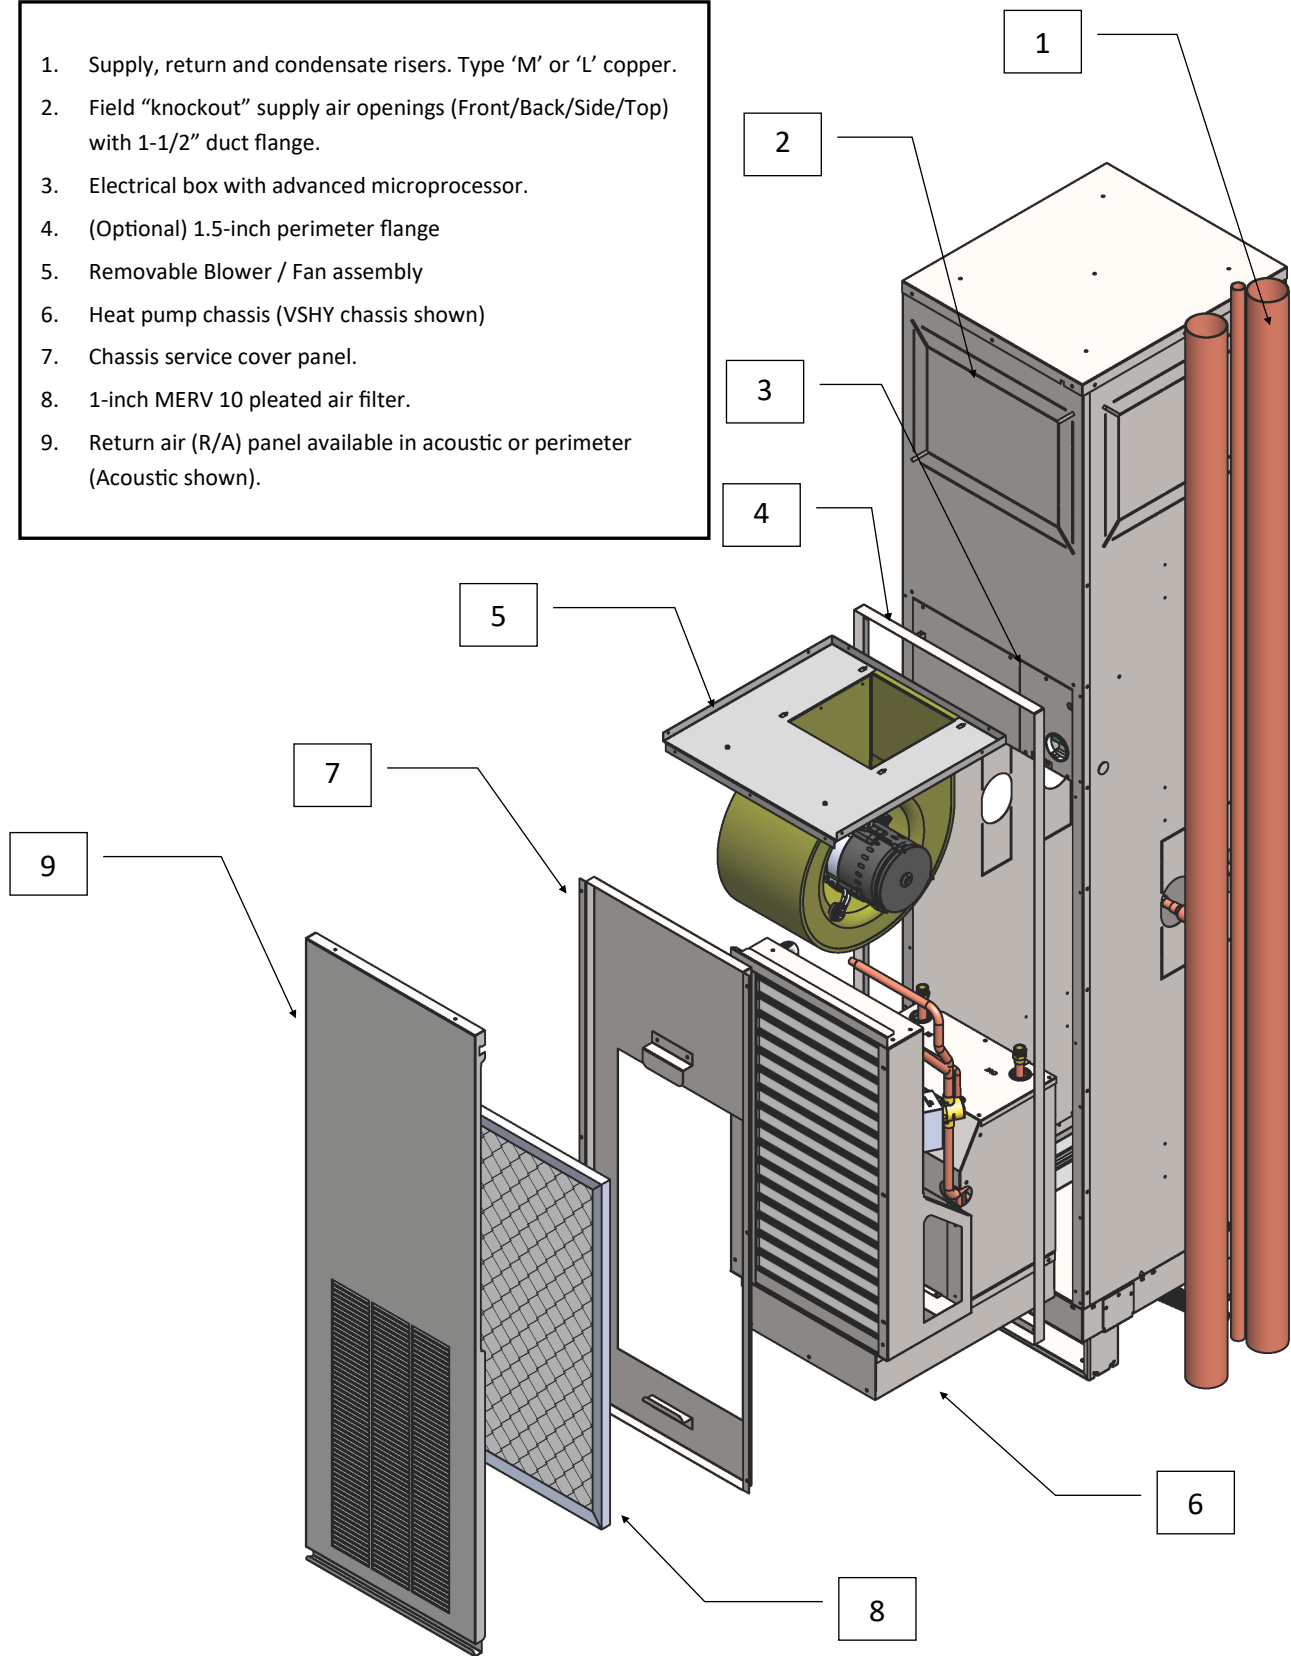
VSHP Assembly View (Silver Series Cabinet)
